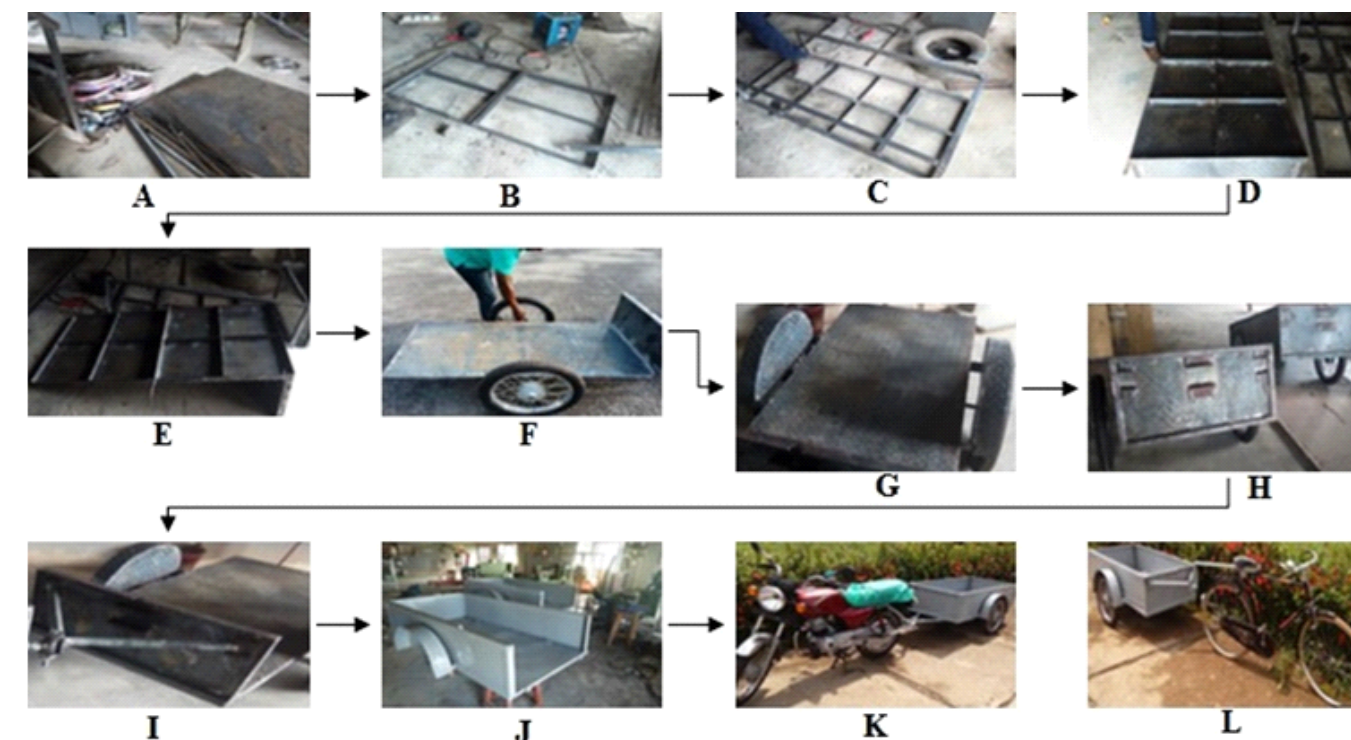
Fabrication process (Key: A – Gathering materials; B & C – Chassis fabrication; D – Fixing plates (or wire mesh); E – Installing Wheel shaft; F – Installing wheels; G – Fixing wheel mud guard; H – Adding hitch point; I – Adding Hitch; J – Painting; & K/L: Mounting on cycles).
